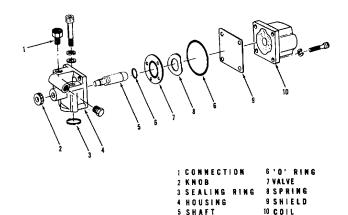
G-29. Electric Shut-Down Valve - Exploded View
